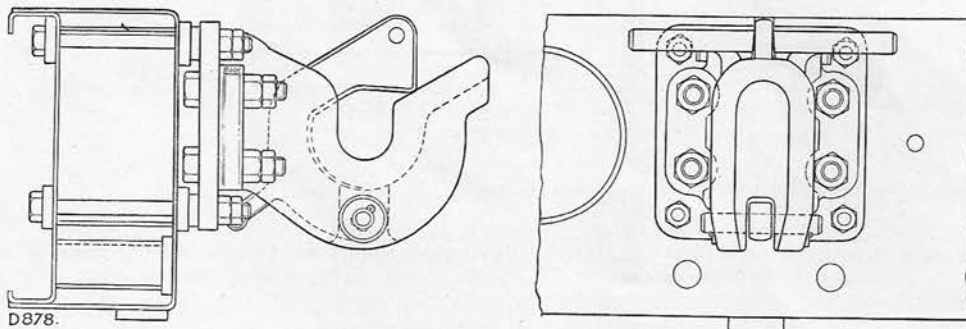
Towing hook Part No. 332978. This item can only be fitted to the chassis frame in conjunction with an adaptor plate.
